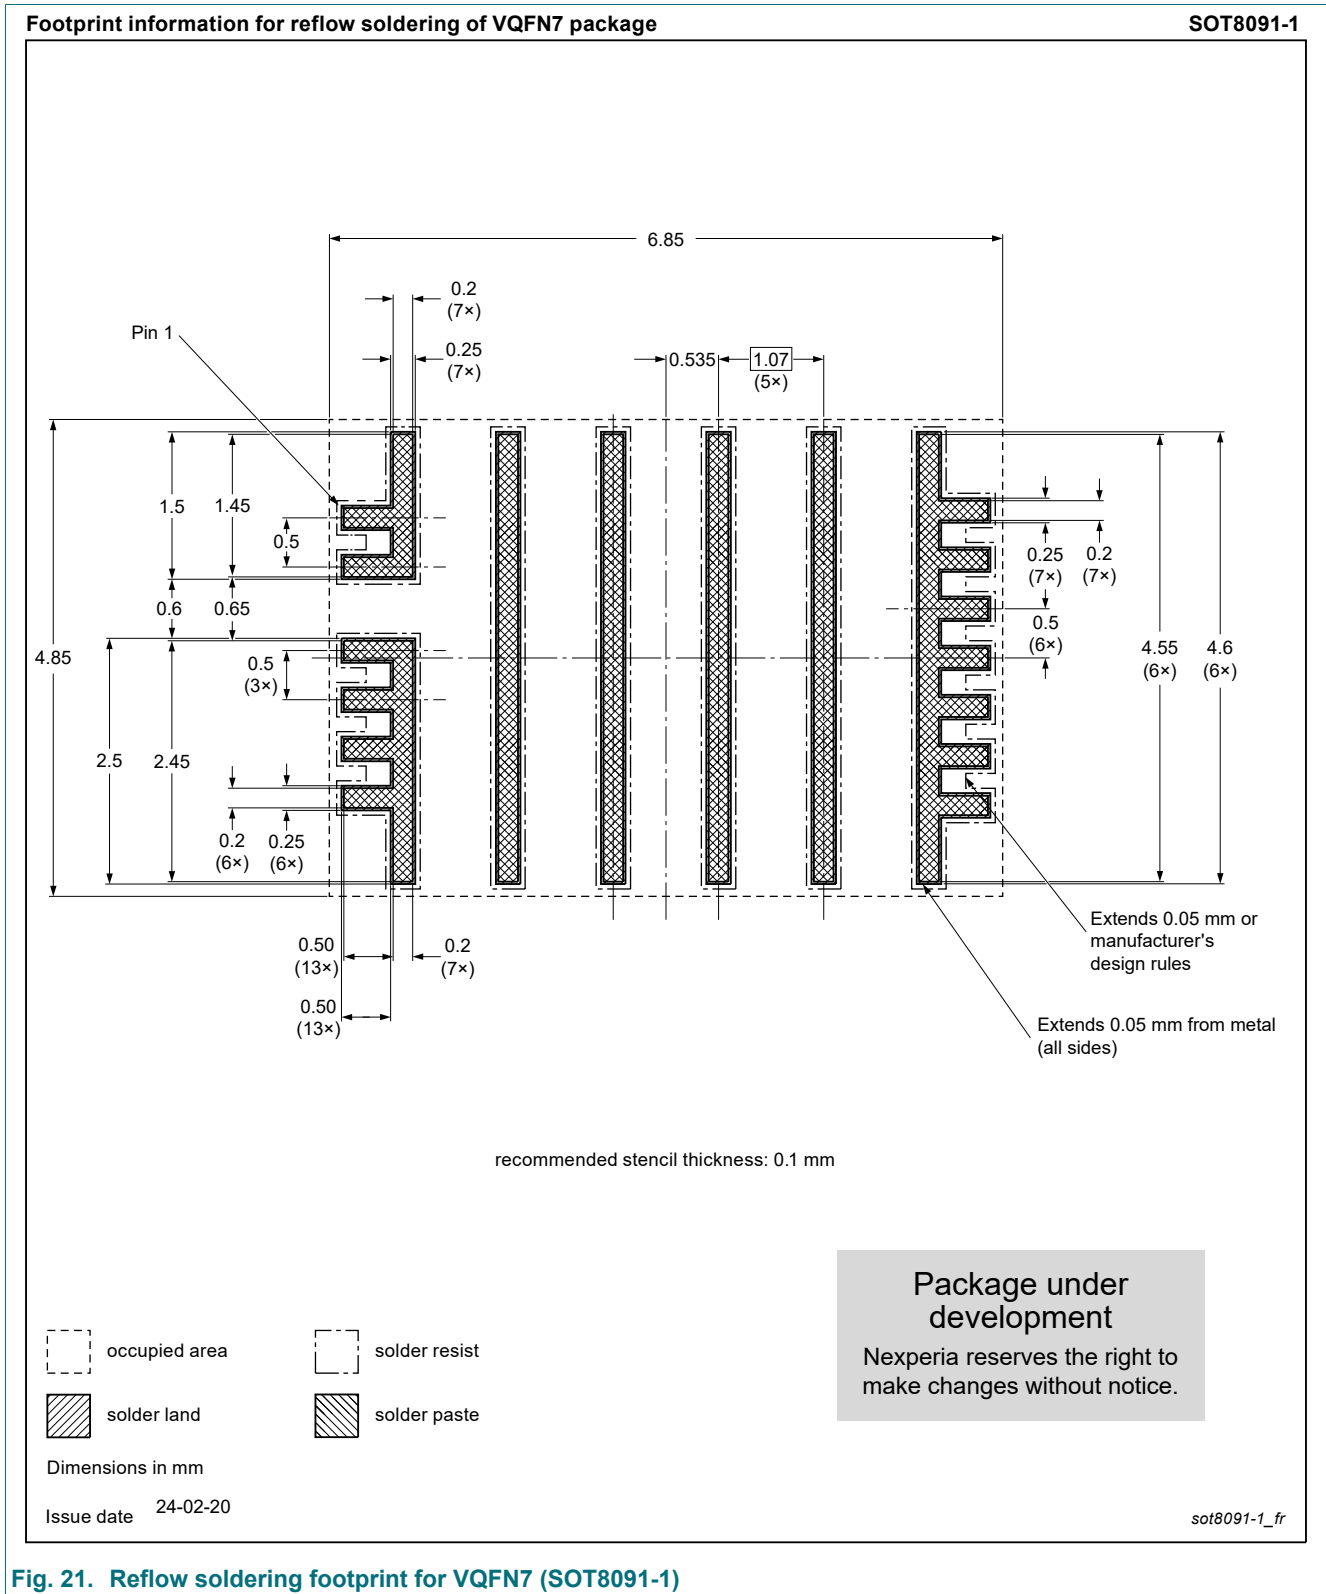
Reflow soldering footprint for VQFN7 (SOT8091-1)
